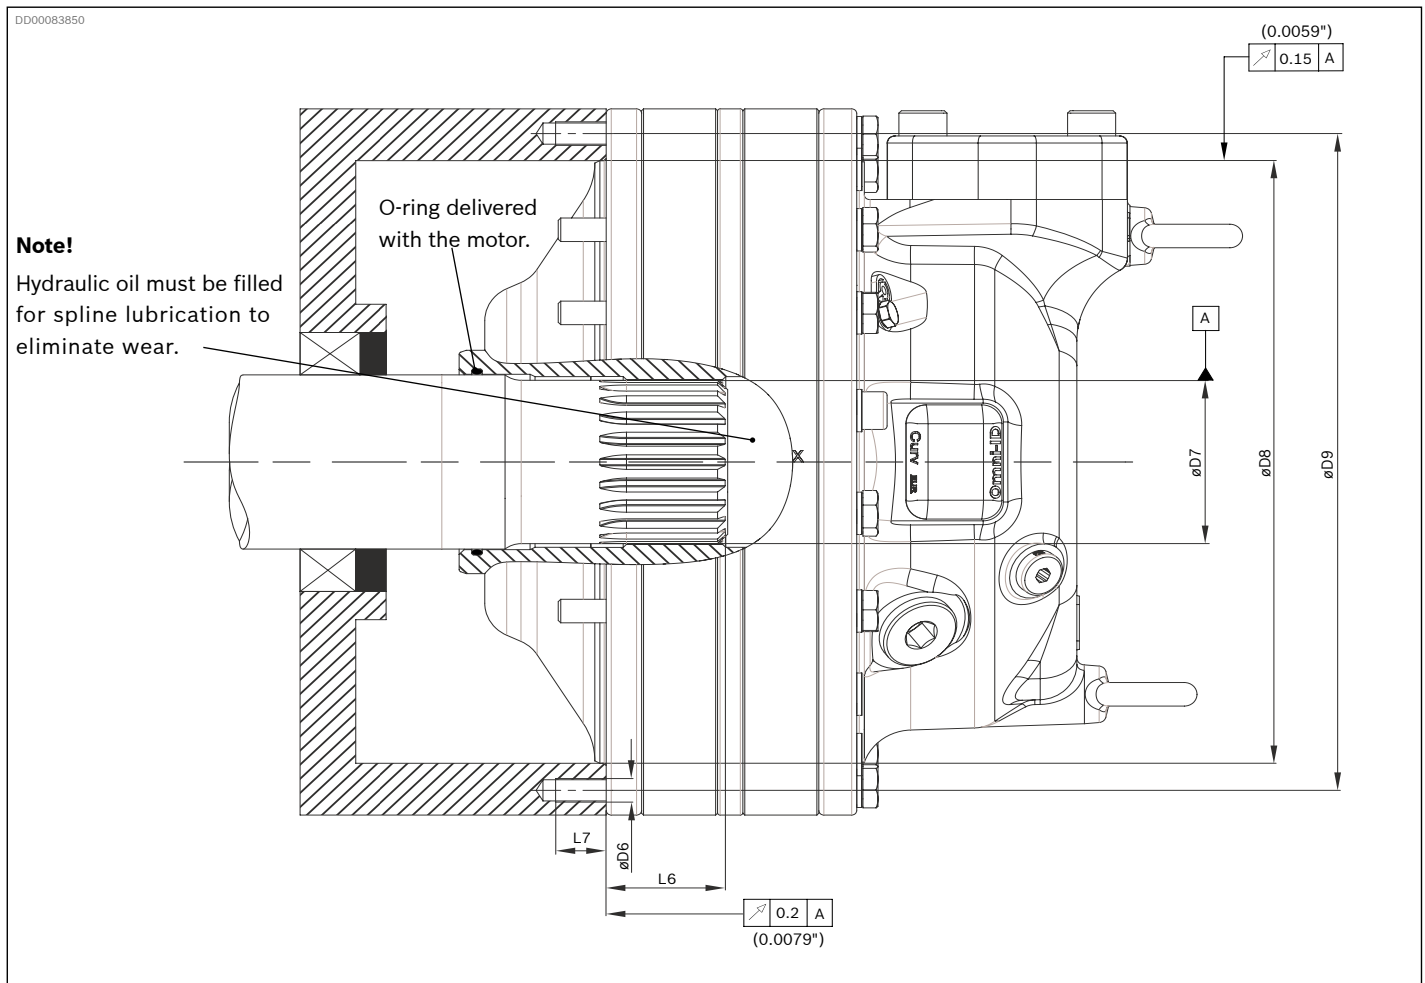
Shaft installation tolerances CAb 10, CAb 20, CAb 30 28 F and CAb 30 30 F (front flange)
